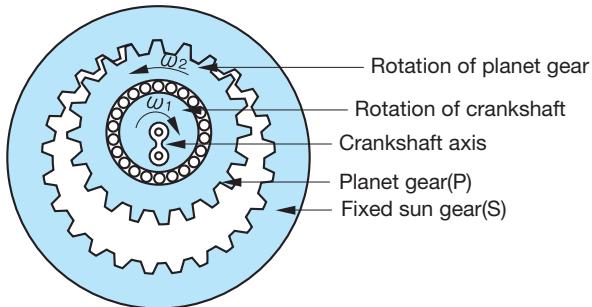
Epitrochoid Planet Gear-Circular(PIN) Tooth Sun Gear Combination
